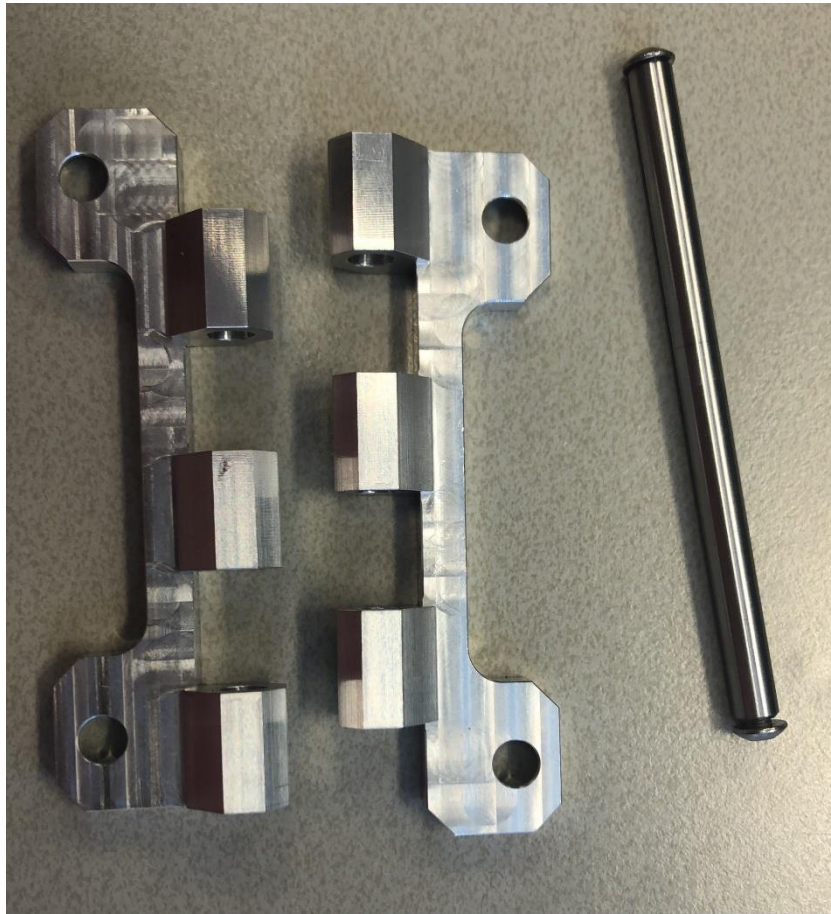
The original hinge as fabricated by Ideal vacuum. disassembled to test if we can remake only one side of the hinge.
